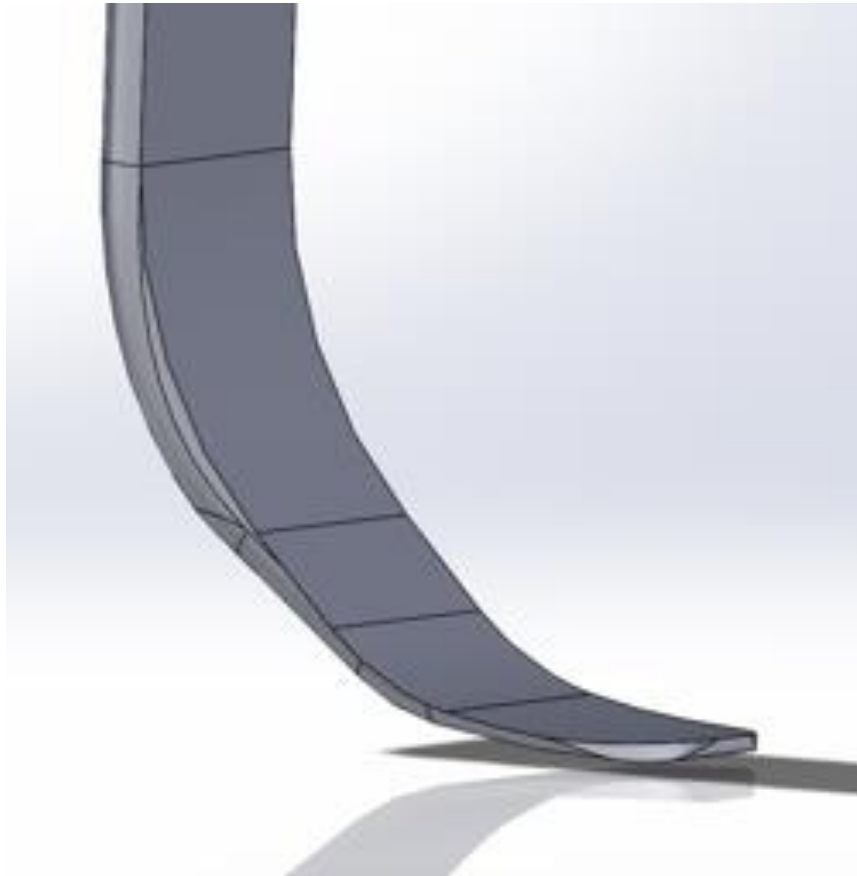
Showing the change in design to allow the crutch to be produced from pre-preg out of a composite mould tool. The production of the crutch will require an accurate die to produce the composite mould, the mould would cover 3 sides with a shaped aluminium face to be sealed on the front face to ensure good compression and surface finish on all 4 surfaces.
